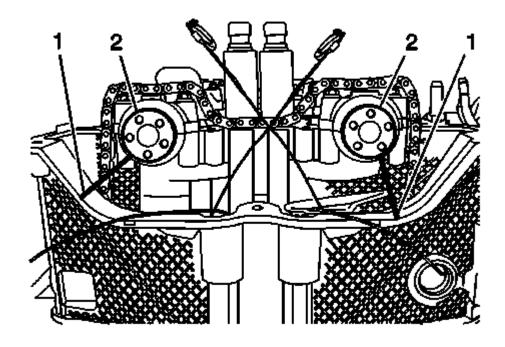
Timing Chain And Camshaft Position Actuator Courtesy of GENERAL MOTORS COMPANY
